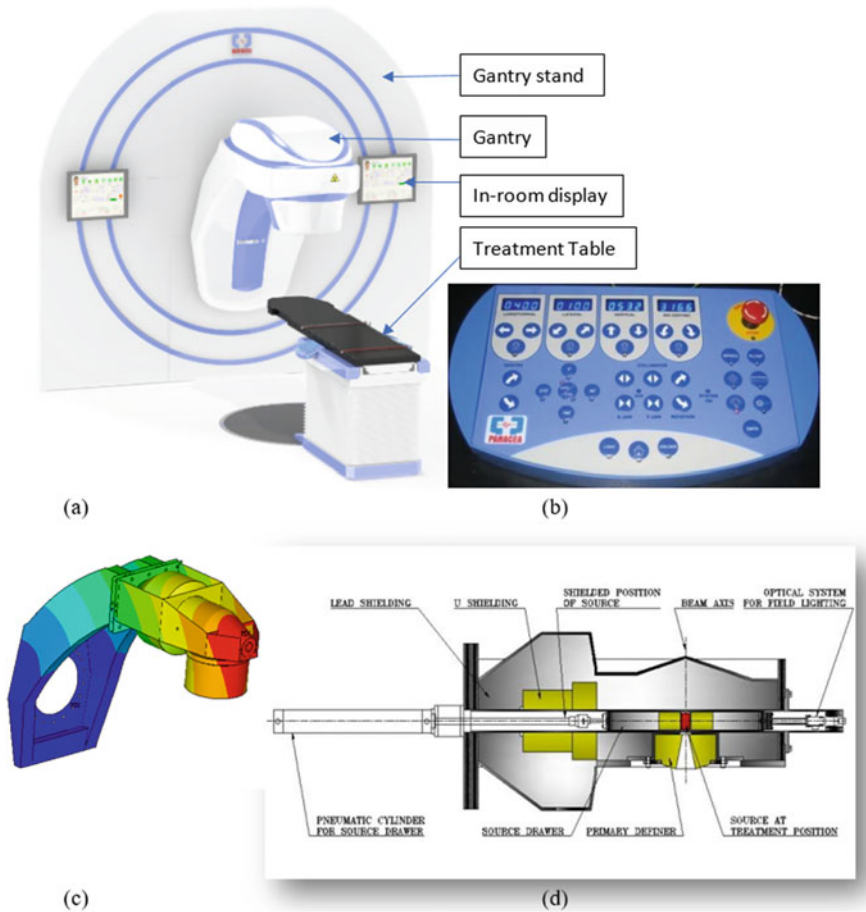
Details of telecobalt machine: a photograph of an isocentric telecobalt machine, b control unit, c gantry and d magnified cross-sectional view of the source head
